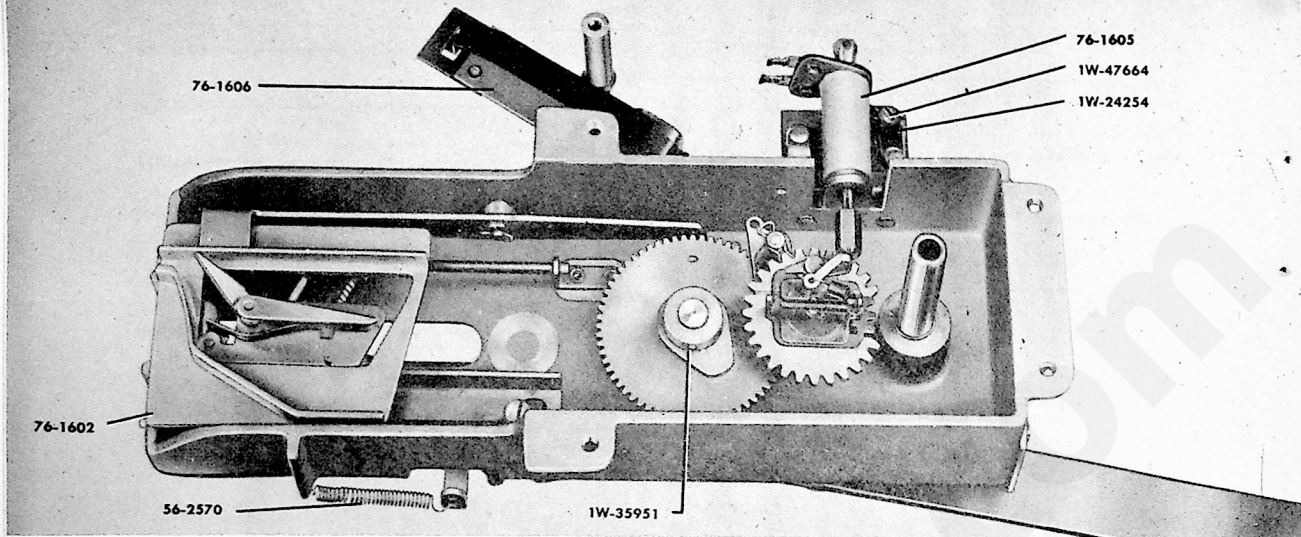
CHANGER MECHANISM ASSEMBLY, TOP VIEW.
